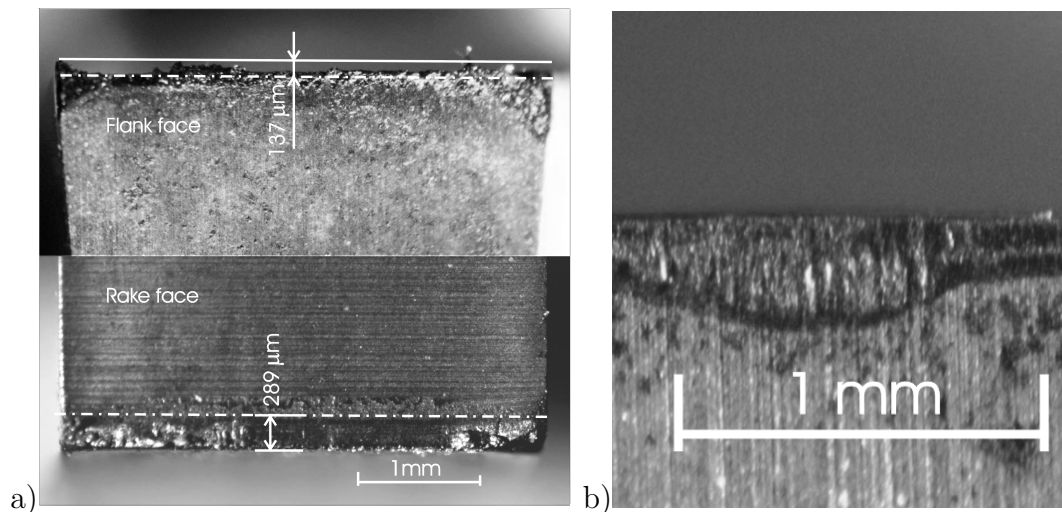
a) Built-up edge when cutting with laser assist at 30m/min b) Traces of abrasive wear on the flank face of the tool for LAM at 30 m/min.
